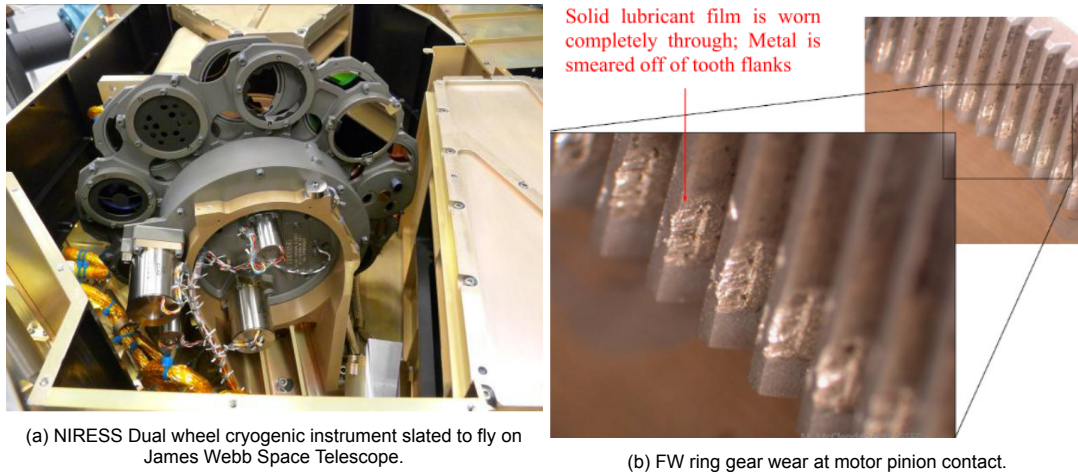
2.2a: NIRESS's filter and pupil wheels are both driven by a stepper motor with a planetary gearhead and a pinion to ring gear. 2.2b: The anti-backlash wheel completely wore through the dry lubricant on the ring gear, leading to a premature failure of the mechanism [9].
